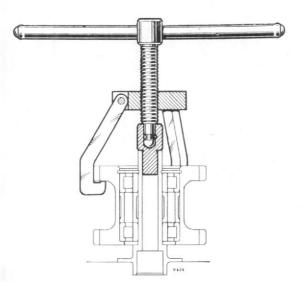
Extractor T.77677 for removing the idler gear, outer roller bearing, spacers, and inner roller race off the gear.
